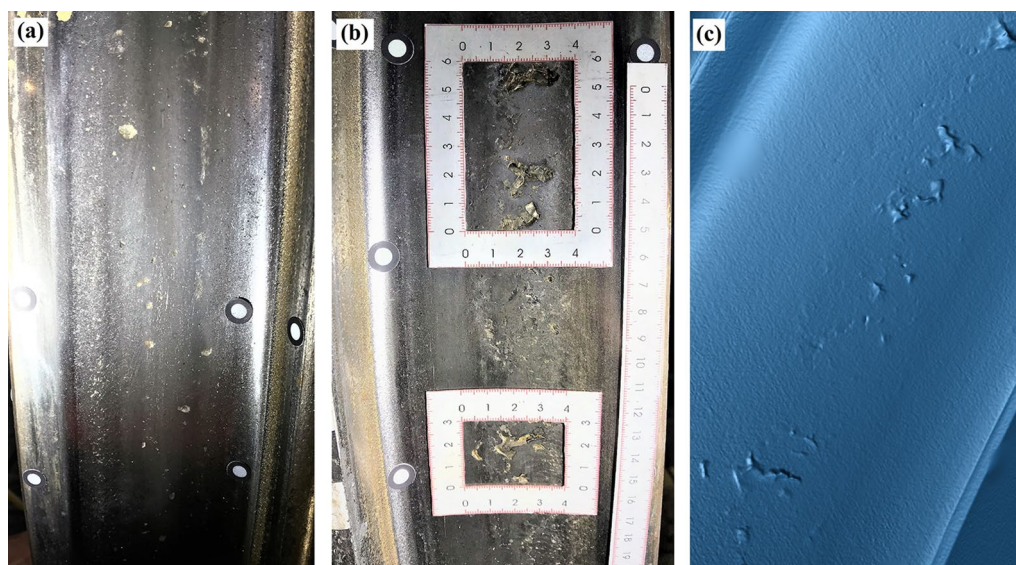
Wheel tread sections of the a less damaged wheel and b severely damaged wheel of the wheelset studied in the field test, and c surface geometry generated from scanning of the severely damaged wheel
